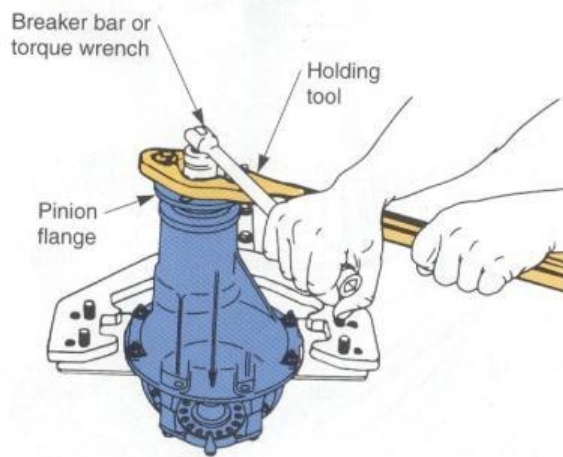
Using a large holding bar is the best way to keep the yoke from turning when tightening the drive pinion nut. If a collapsible spacer is used, tighten the nut in small increments and measure the preload. Without collapsible spacer, you must torque nut to specifications.
